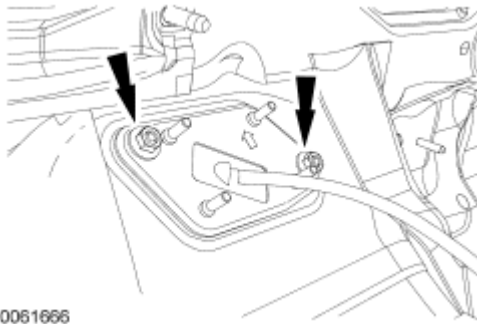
Locating Selector Lever Cable Grommet Nuts
